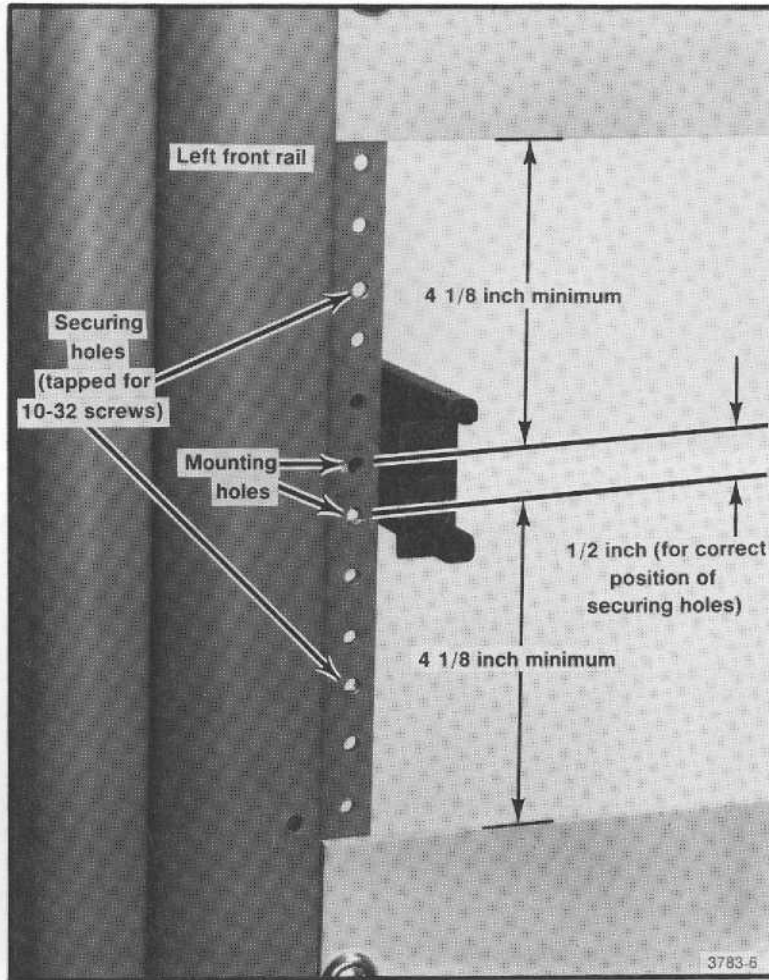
Measurements of front-rail mounting holes for the stationary sections.
